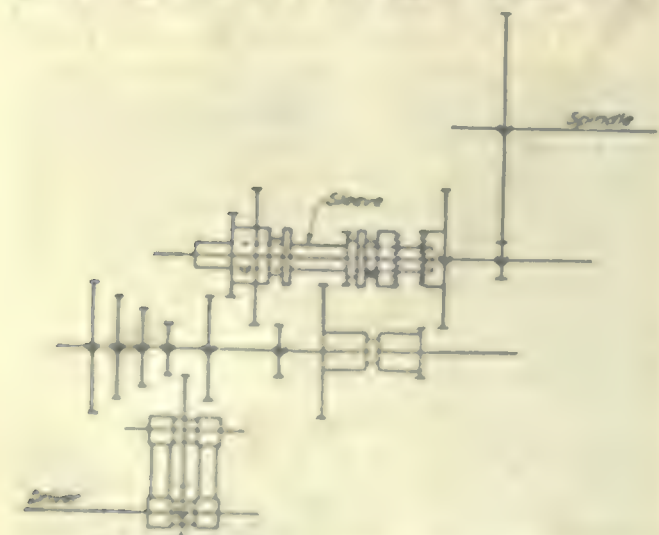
DIAGRAM OF MODIFIED DRIVE WHICH USES SMALLER GEARS
